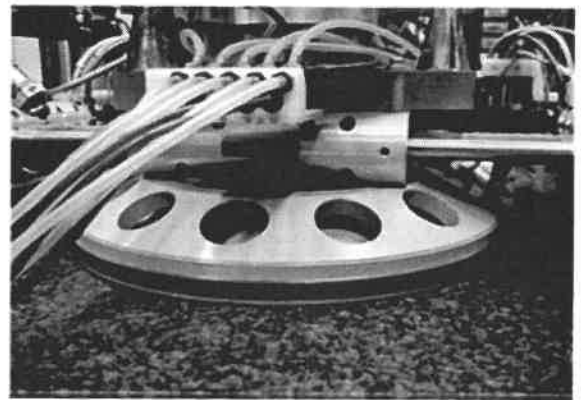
Photograph of a linear motor driven and air-bearing supported wafer stage.
